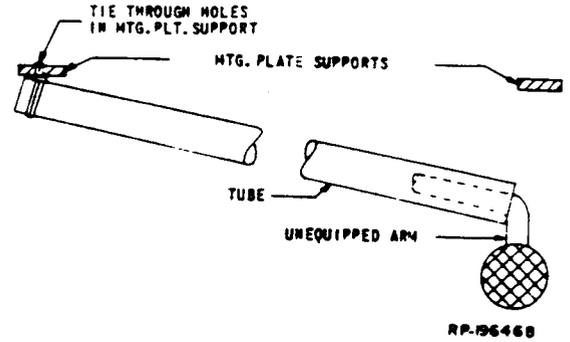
SUPPORTING COMPLETELY UNEQUIPPED HORIZONTAL CABLE ARMS IN SWITCHBOARDS AND DESKS WHEN MOUNTING PLATES ARE OMITTED (PAR. 2.52)
